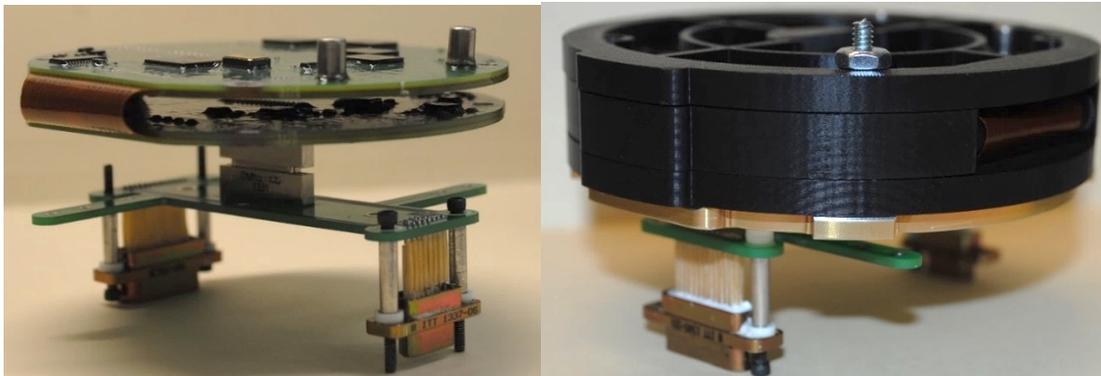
OBR in (Left) Board Form and (Right) with Spacers
